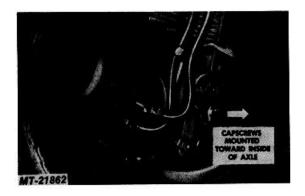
Capscrew Positioned Toward Center of Vehicle
